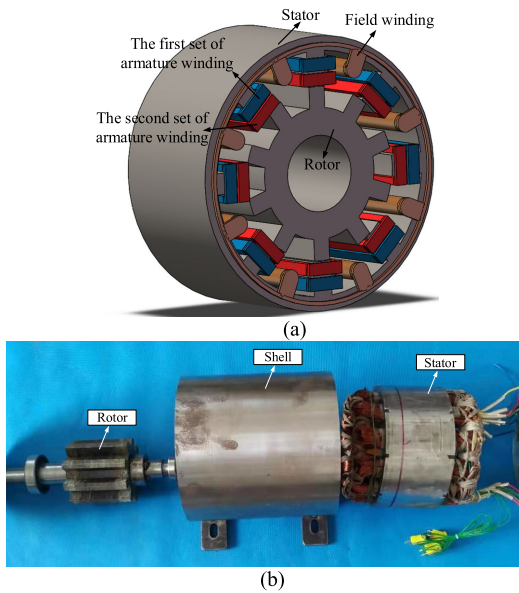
Prototype (a) 3D view of the prototype (b) Assembly.
